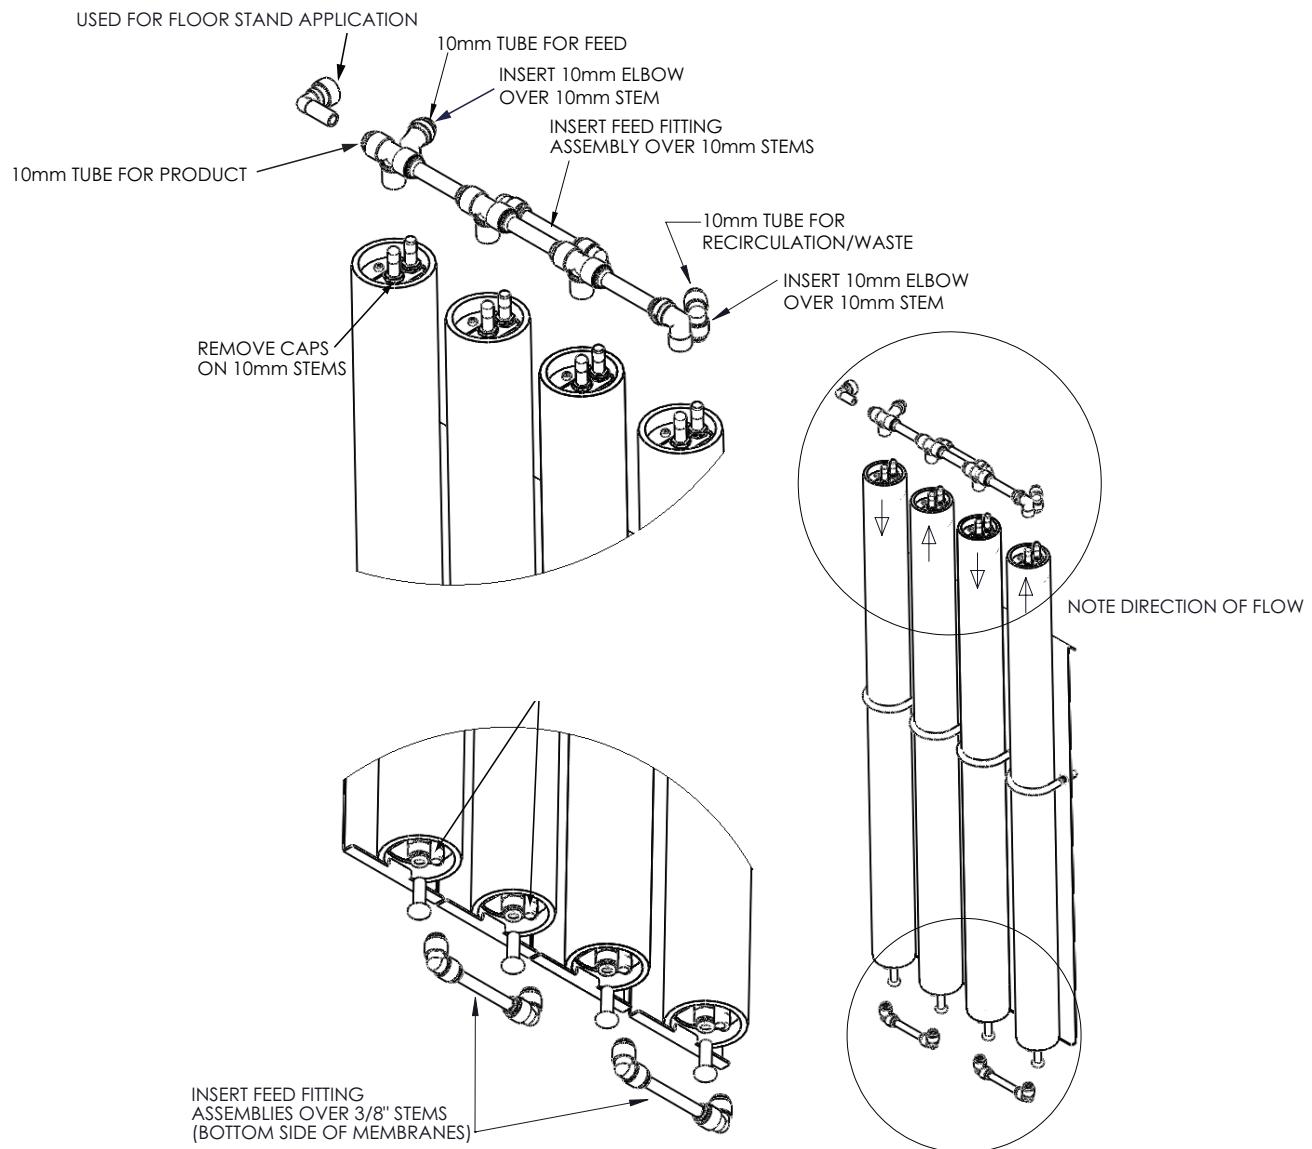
RO 4S/4L tubing assembly instructions, 230V.
